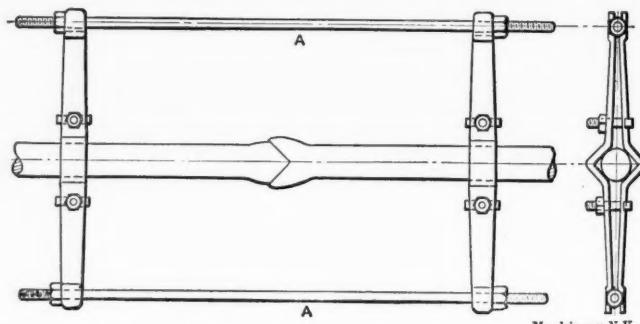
Heavy Shafting prepared for Welding.
